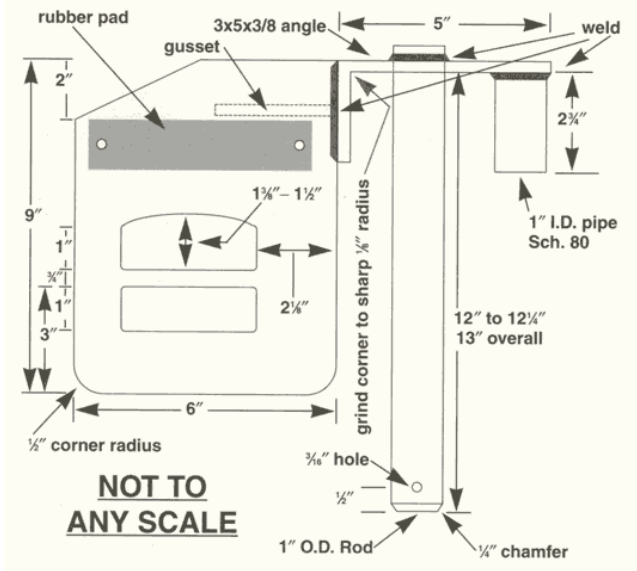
E.O.T. mounting plate, knuckle mount (side view). Design by Mark Bucol
